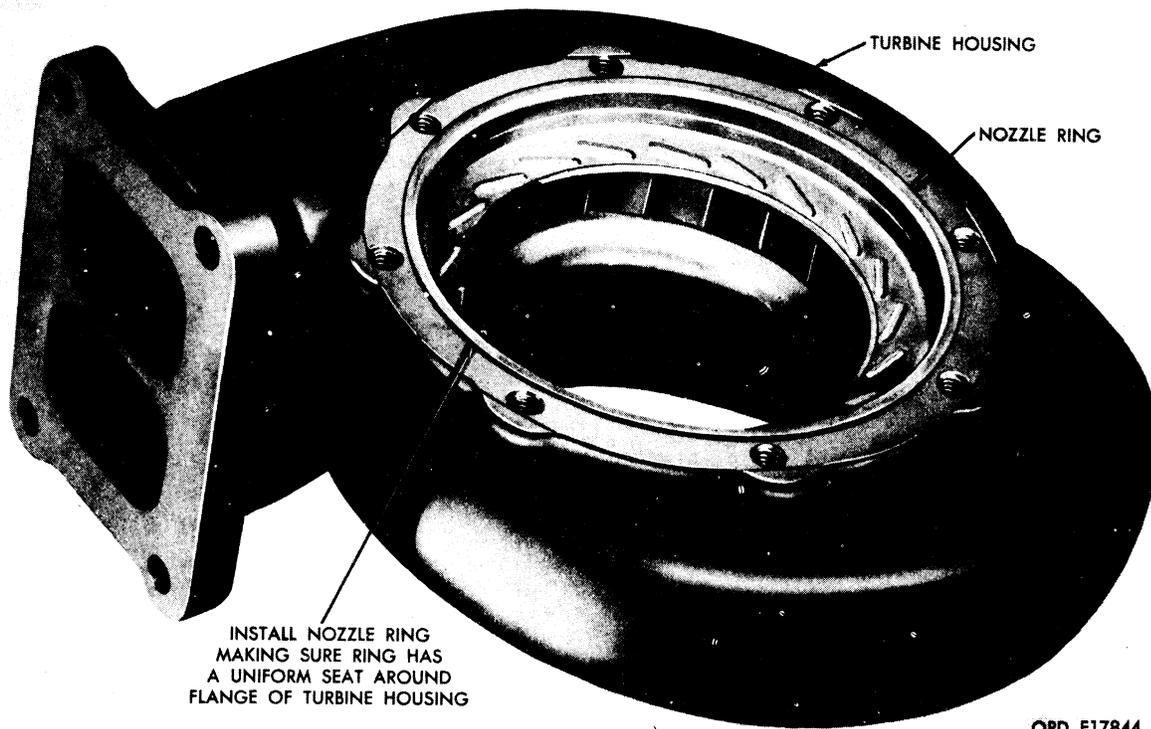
INSTALLING NOZZLE RING IN TURBINE HOUSING - TURBOCHARGERS 7748900, 10935279, AND 53591-C-139552.
